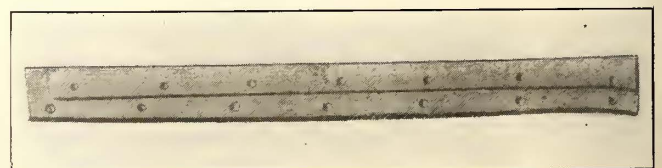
PLATE WELDED TO ANGLE IRON DOOR GUIDE
